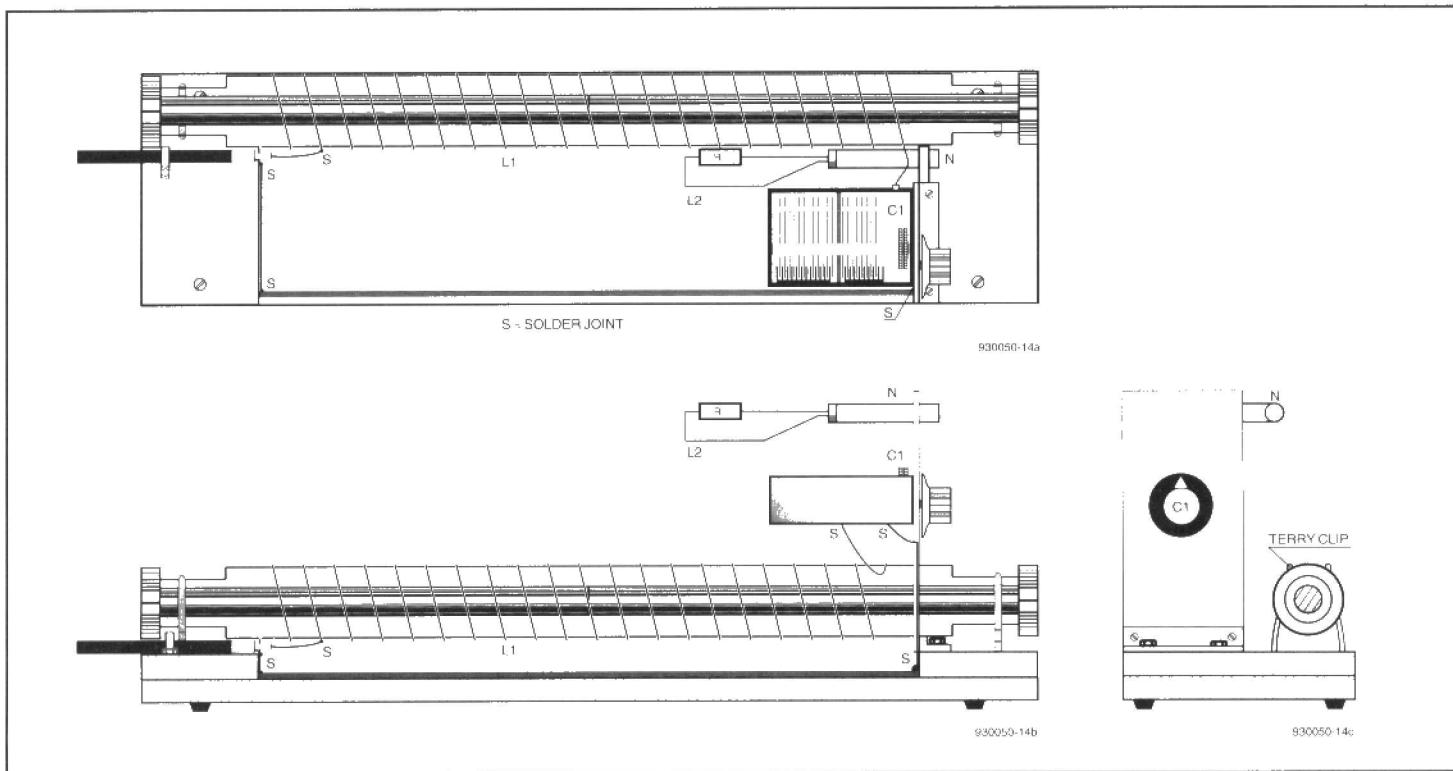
Final assembly (Fig. 2 + Fig. 3. + wiring).
